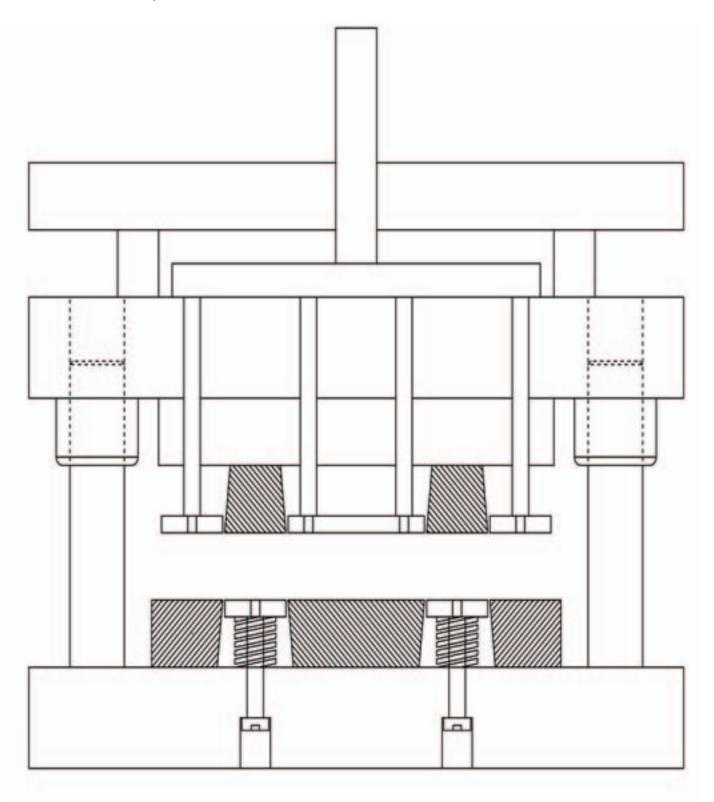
22 Completed Die with Knockout Knockout removes slug from part.
